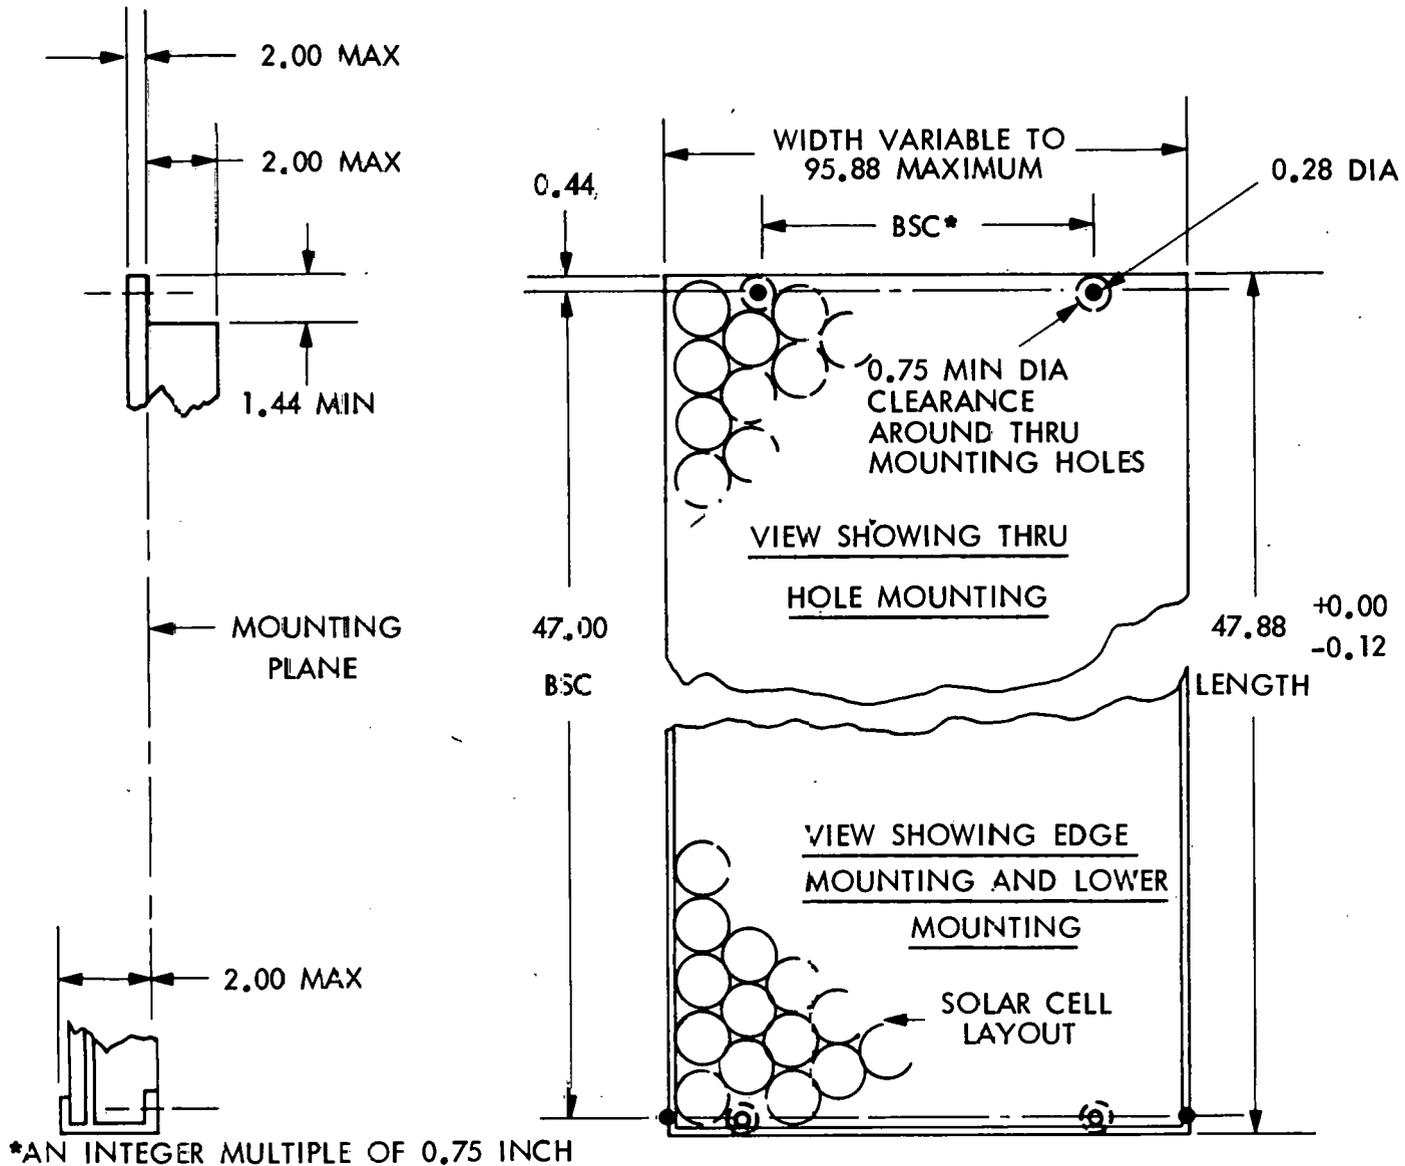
Suggested Module Standard Dimensions (all dimensions in inches)
